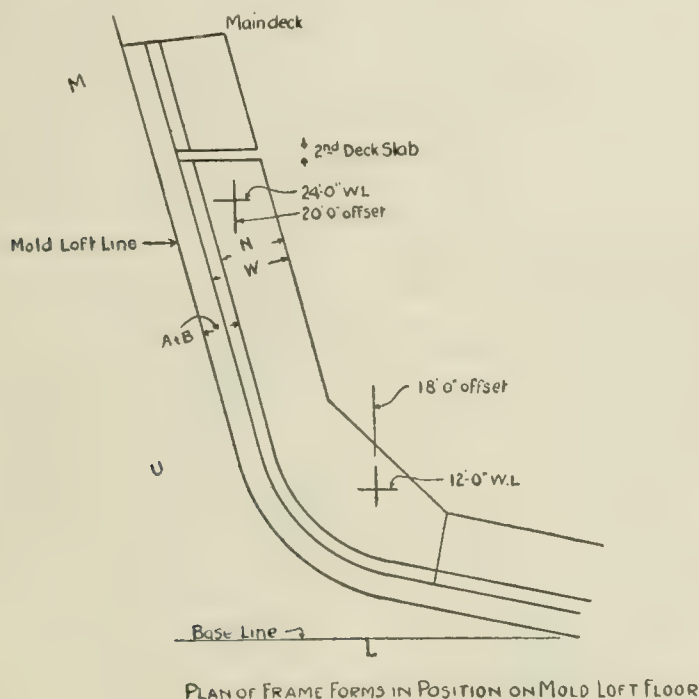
PLAN OF FRAME FORMS IN POSITION ON MOLD LOFT FLOOR, AND RIG FOR ASSEMBLING AND BRACING.
